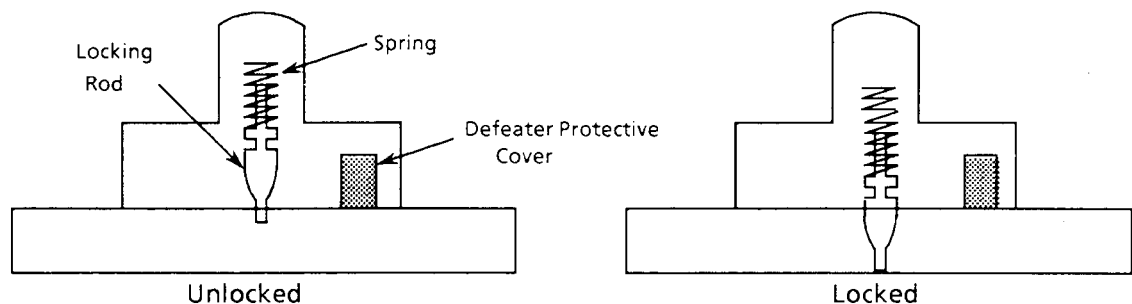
Side View Cutaway of Disconnect Switch Operator
